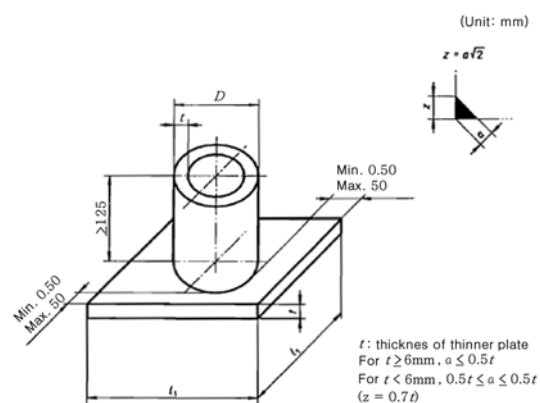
Dimensions and types of test assembly for pipe fillet welds
